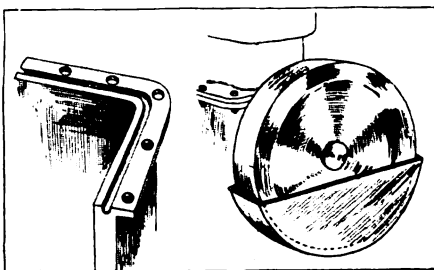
Left—Groove cut in flange to prevent oil leakage. Fig. 4—Tight-fitting case to prevent flywheel throwing oil
